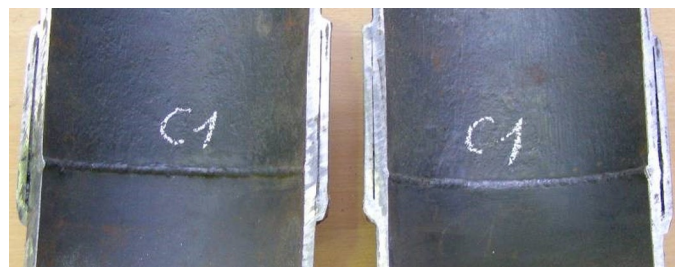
View of C1 welded joint from the root side; visible sealing band
